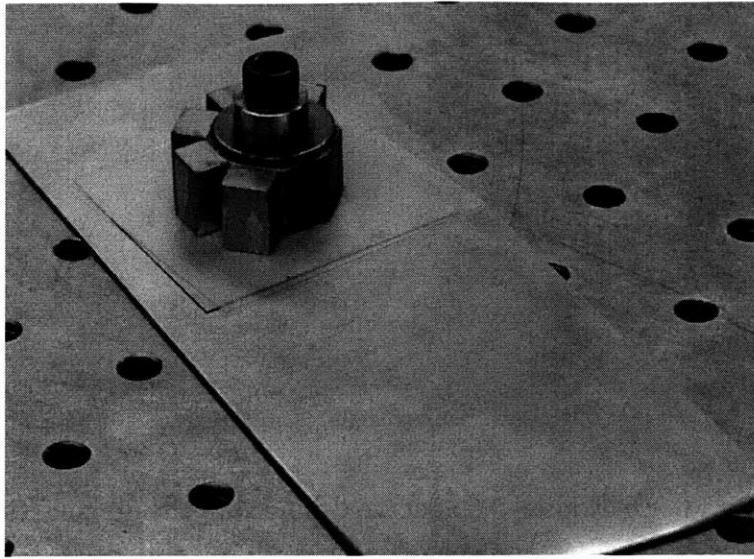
Assembly of the magnet array with the second fixture. The steel optical table partially shorts out the magnets already assembled and attracts the incoming magnet so that the force required to position it is reduced.
